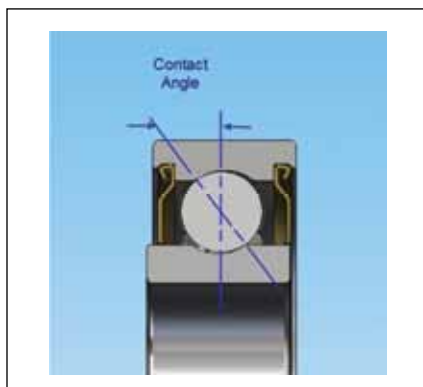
Axially pre-loaded bearings establish a “contact angle.”
